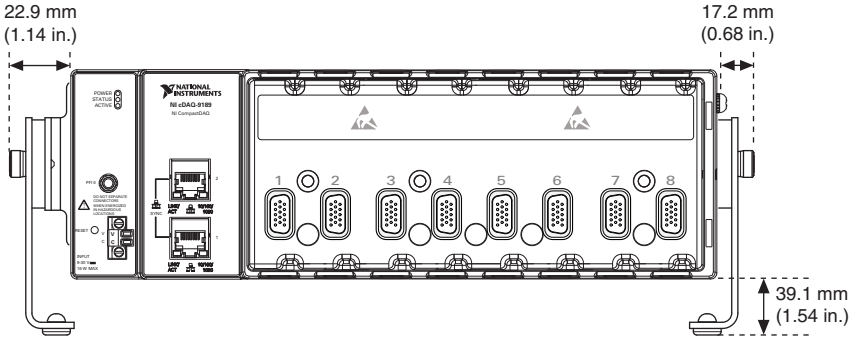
Attaching the Desktop Mounting Kit (cDAQ-9189 Shown)
